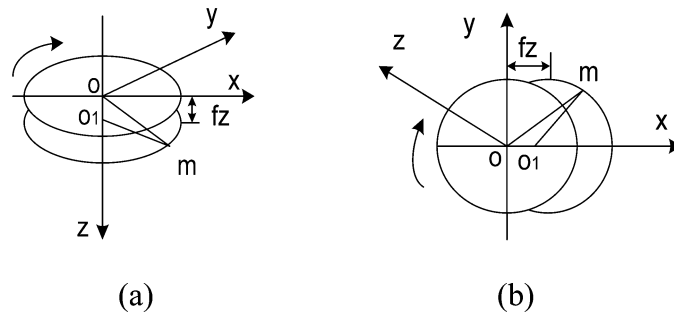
Cutting edge trajectory in plunge milling (a) and conventional milling (b).
